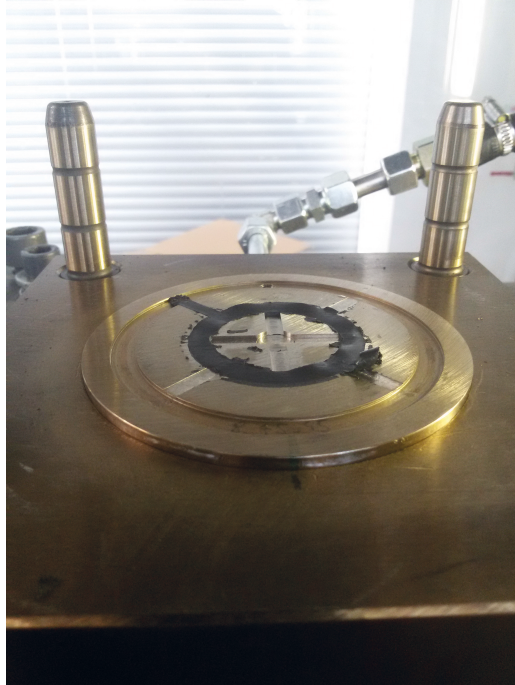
Demoulding of the FKM rubber caused fractures at the runner gates
